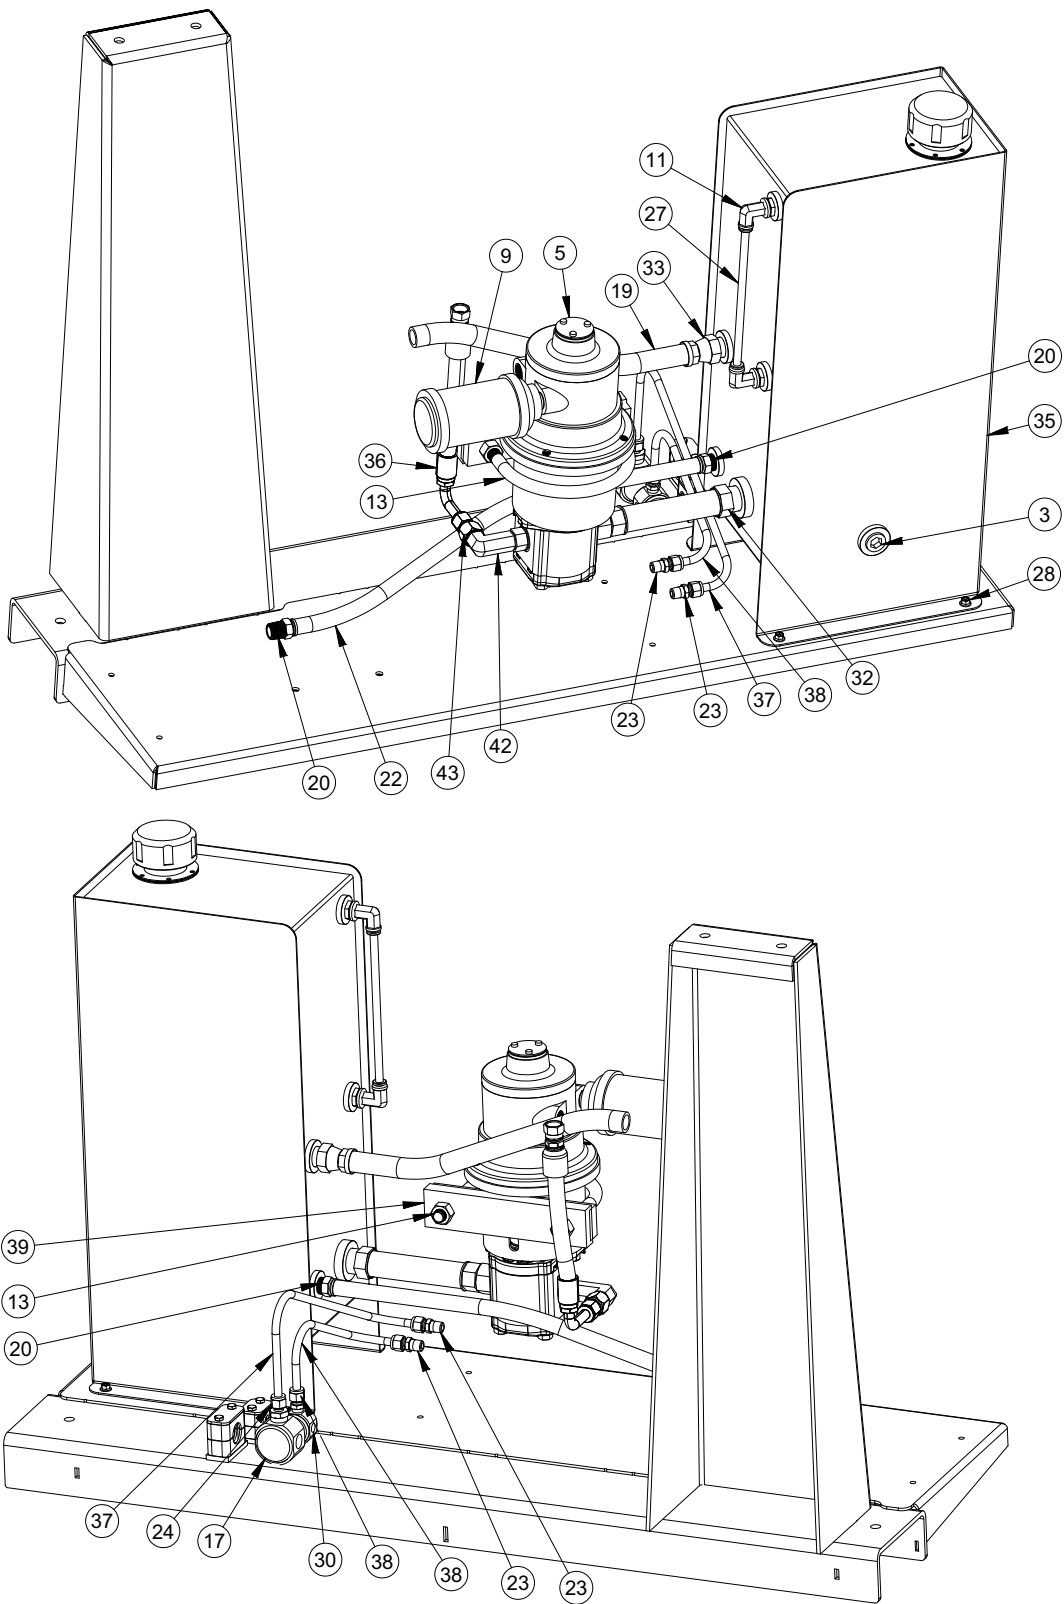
USV-2-25T ASSEMBLY 3 (P/N 90206)
